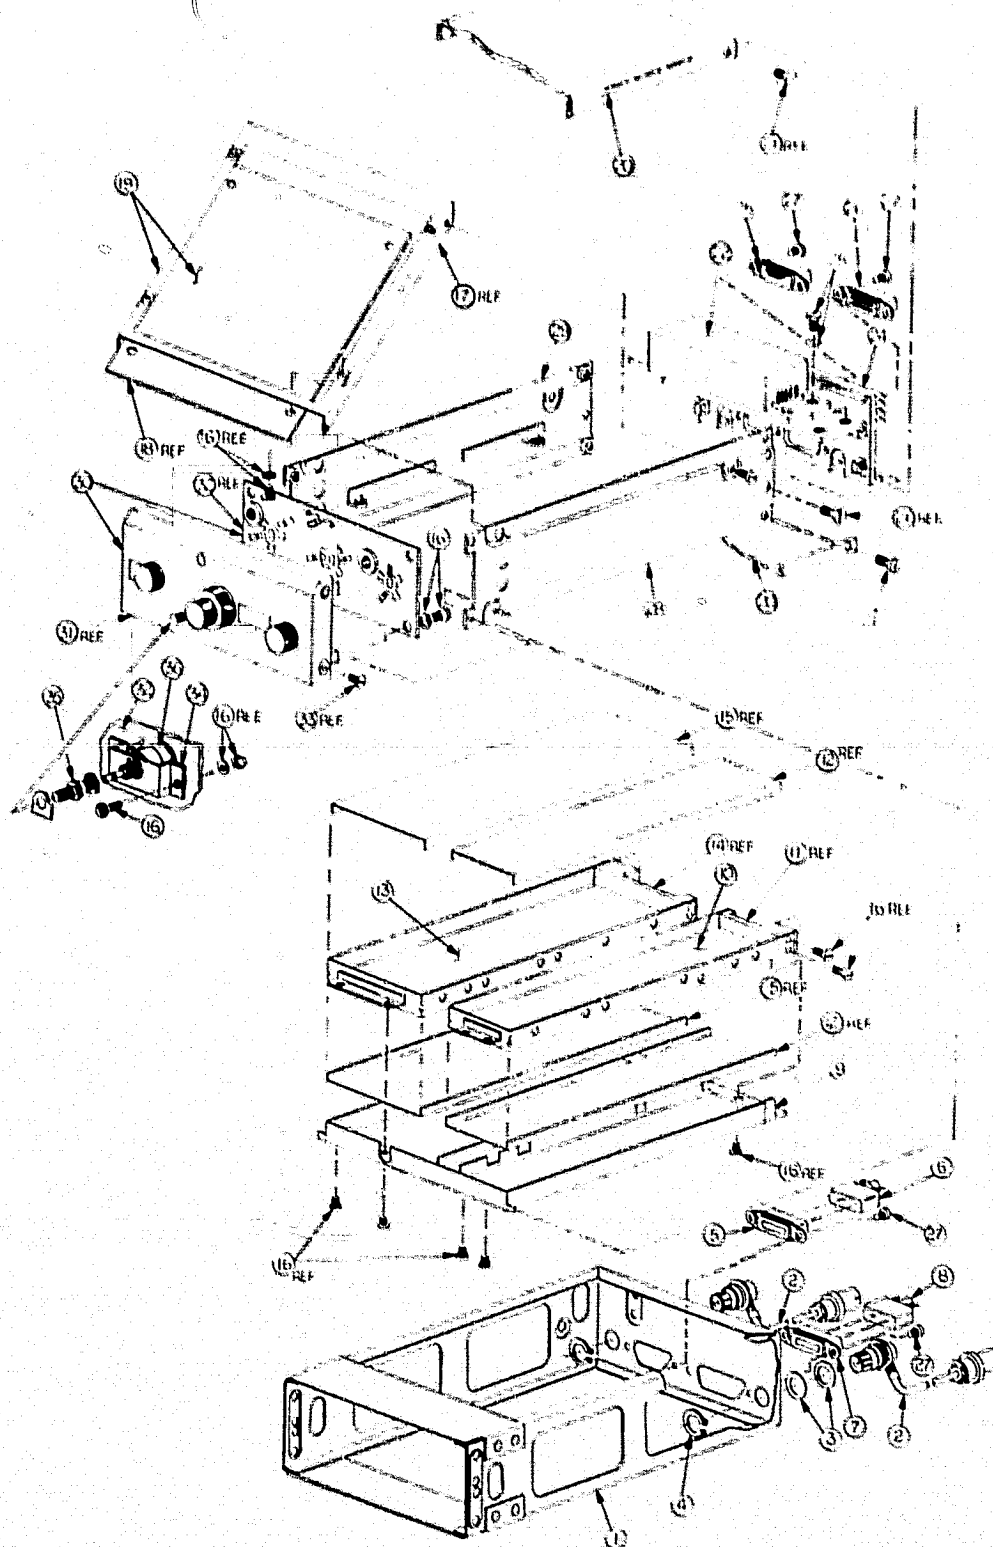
MLS RECEIVER EXPLODED VIEW DRAWING
